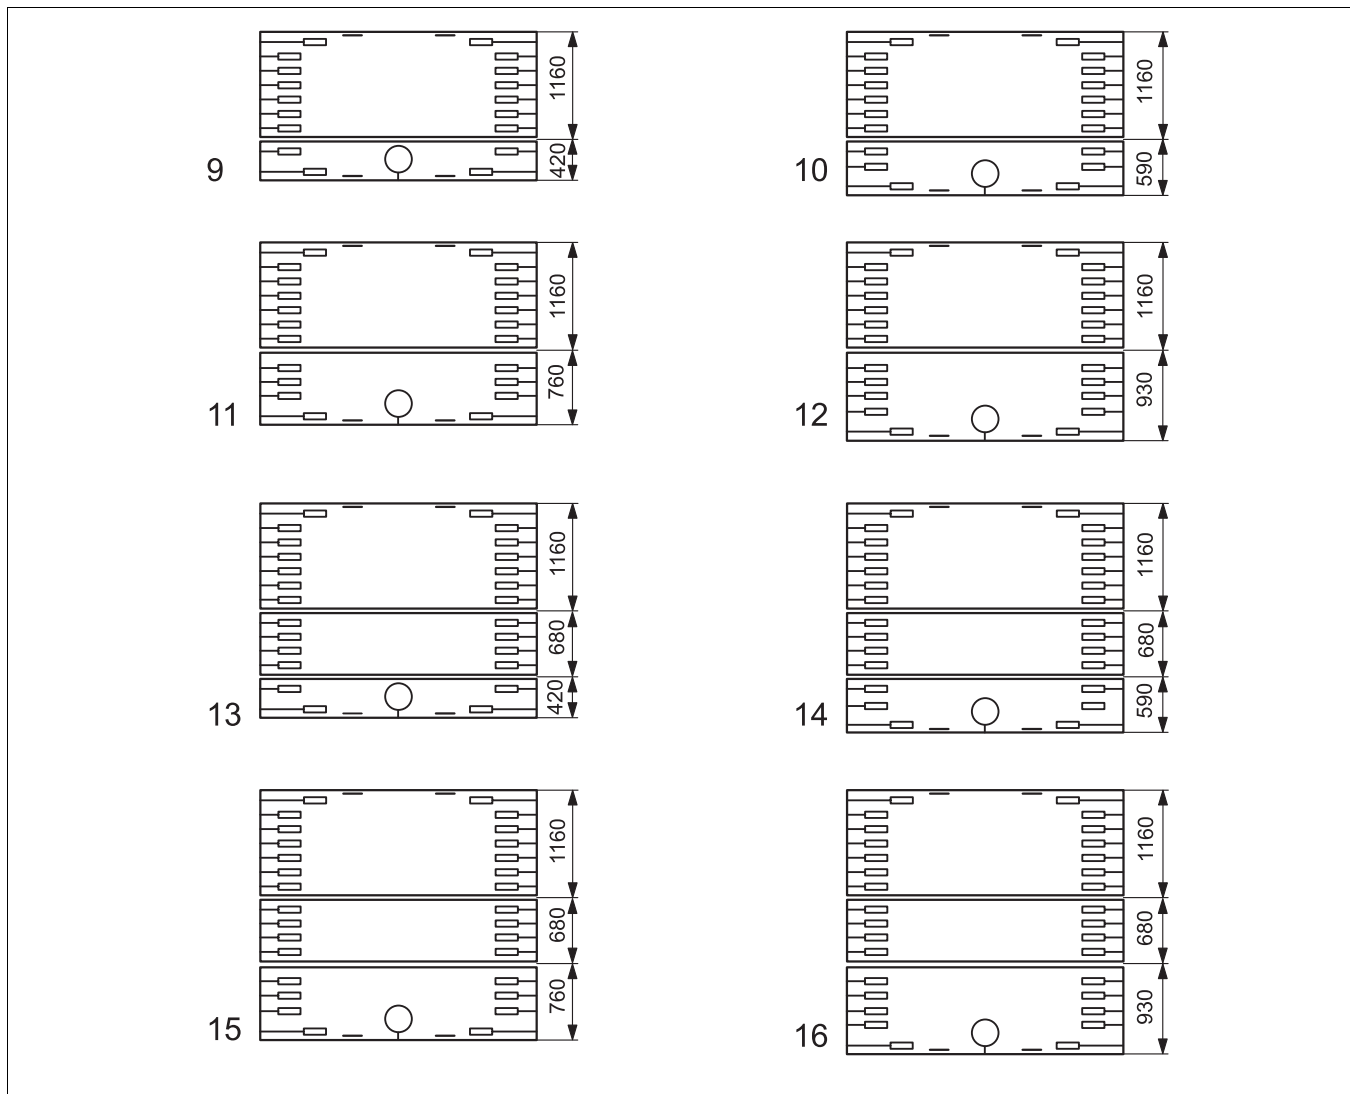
Lagging for the various boiler sizes (dimensions in mm)
